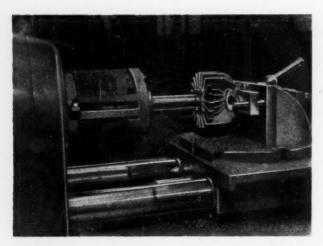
Set-up for Boring the Cylinder on a Grob Fineboring Machine
